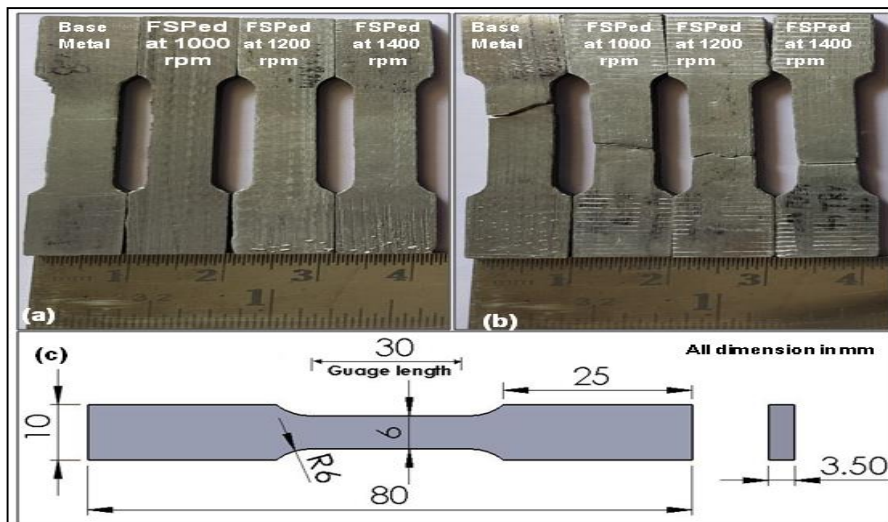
Tensile samples (a) Before fracture (b) After fracture
